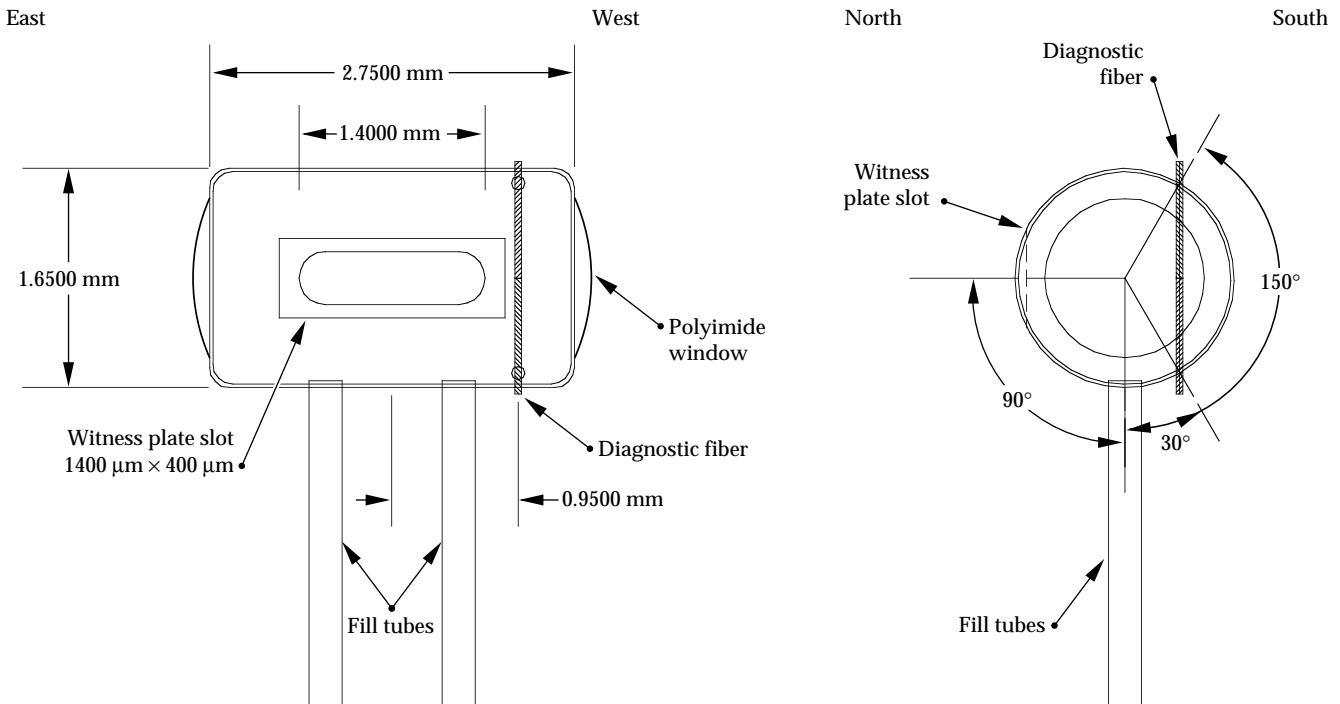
A CAD drawing of a closed-geometry target. (10-00-0795-1777pb02)
